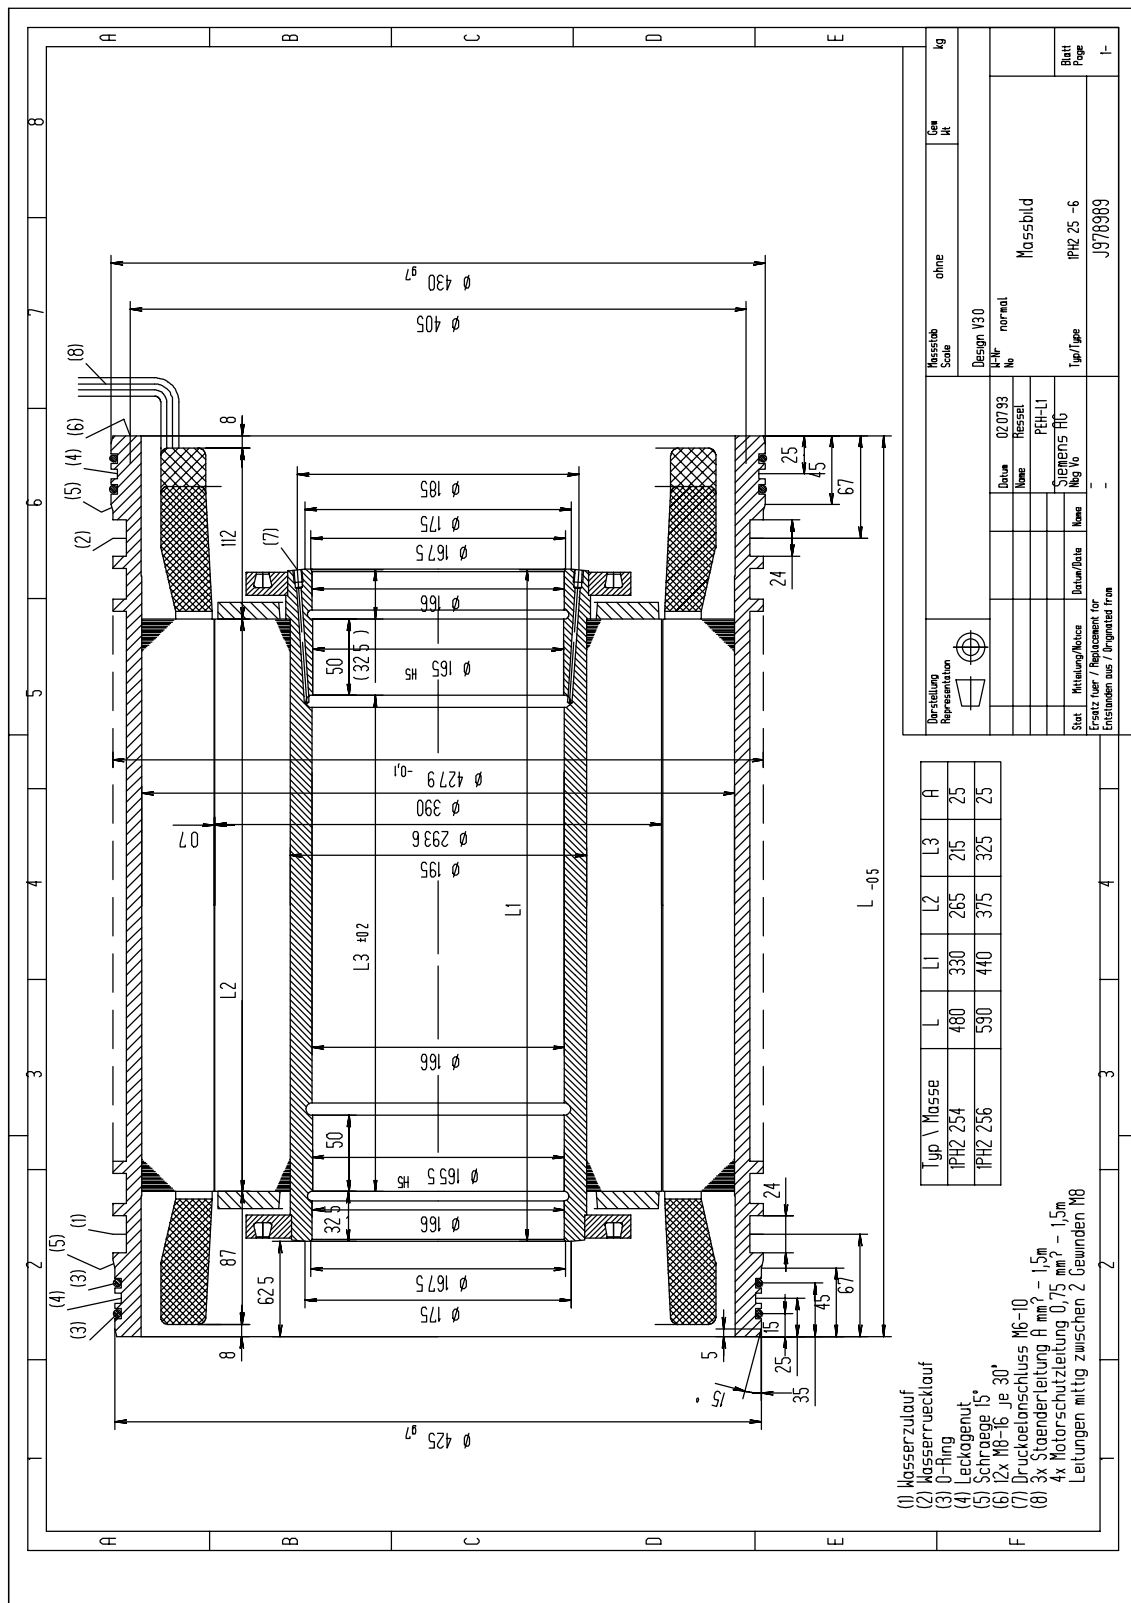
1PH225-6W motor dimensions (dimension drawing)
